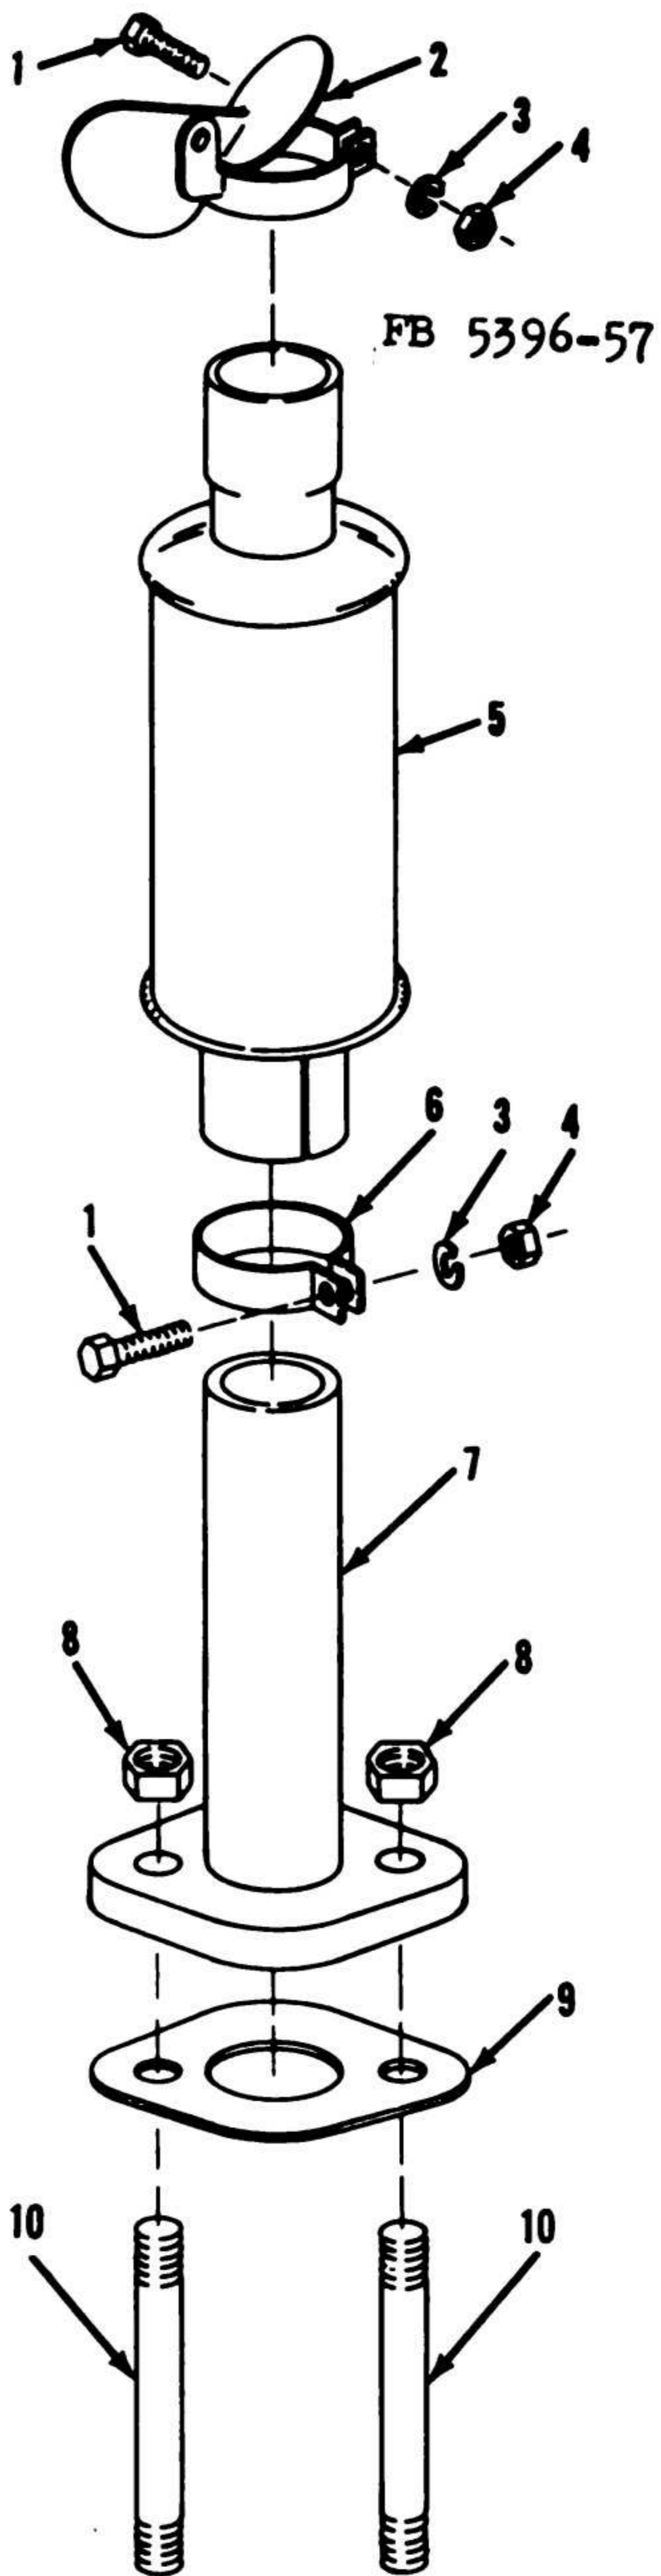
Exhaust pipe, muffler, and weather cap, exploded view.
